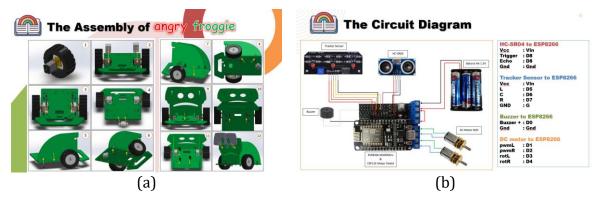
"Angry Froggie" Robot Assembly Stages (a) mechanical parts, (b) electrical parts.
